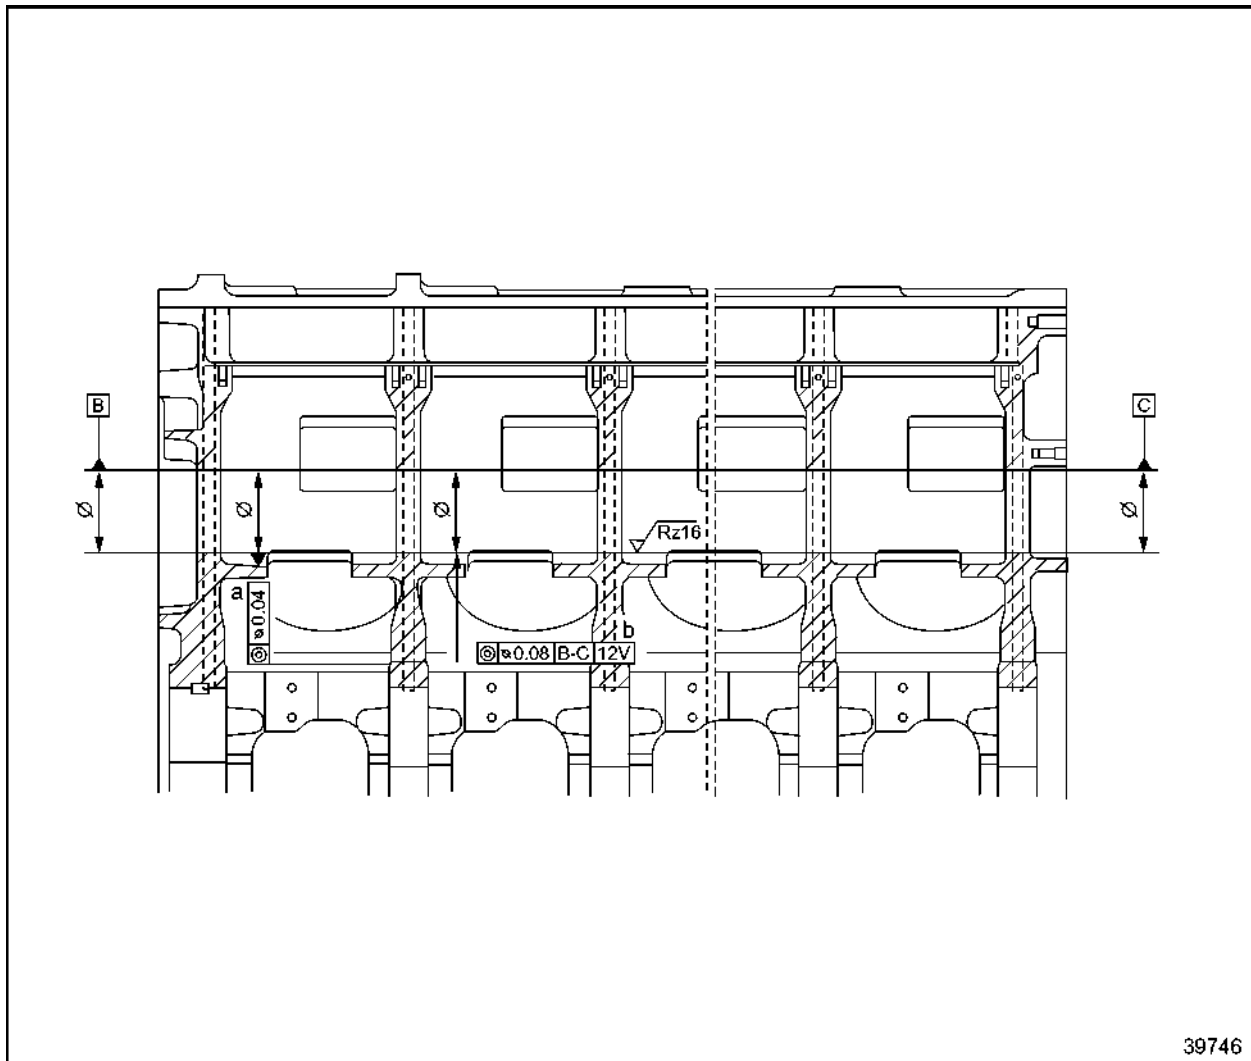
Coaxial Tolerance Points of Cylinder Block Bores for Camshaft Bearings
